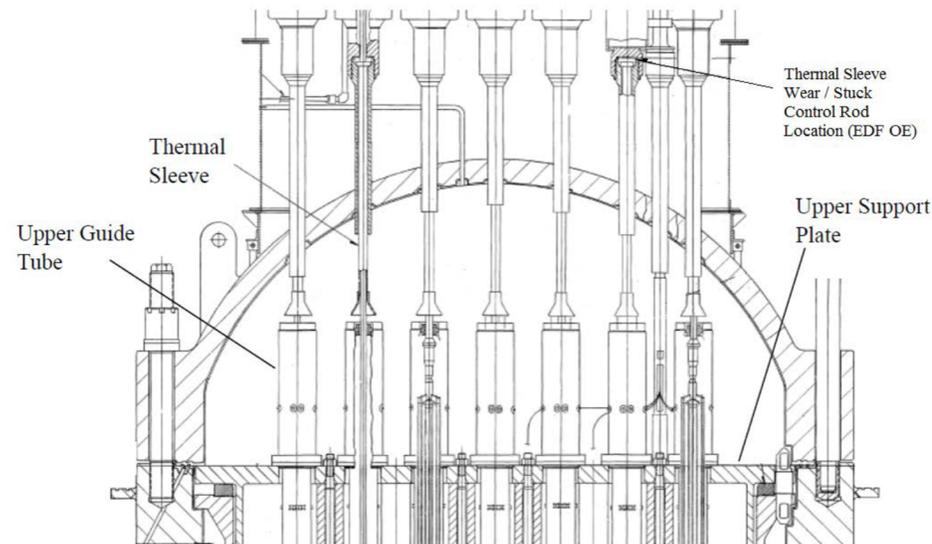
Example Cross-Section of Westinghouse PWR Closure Head assembly, CRDM Thermal Sleeve
